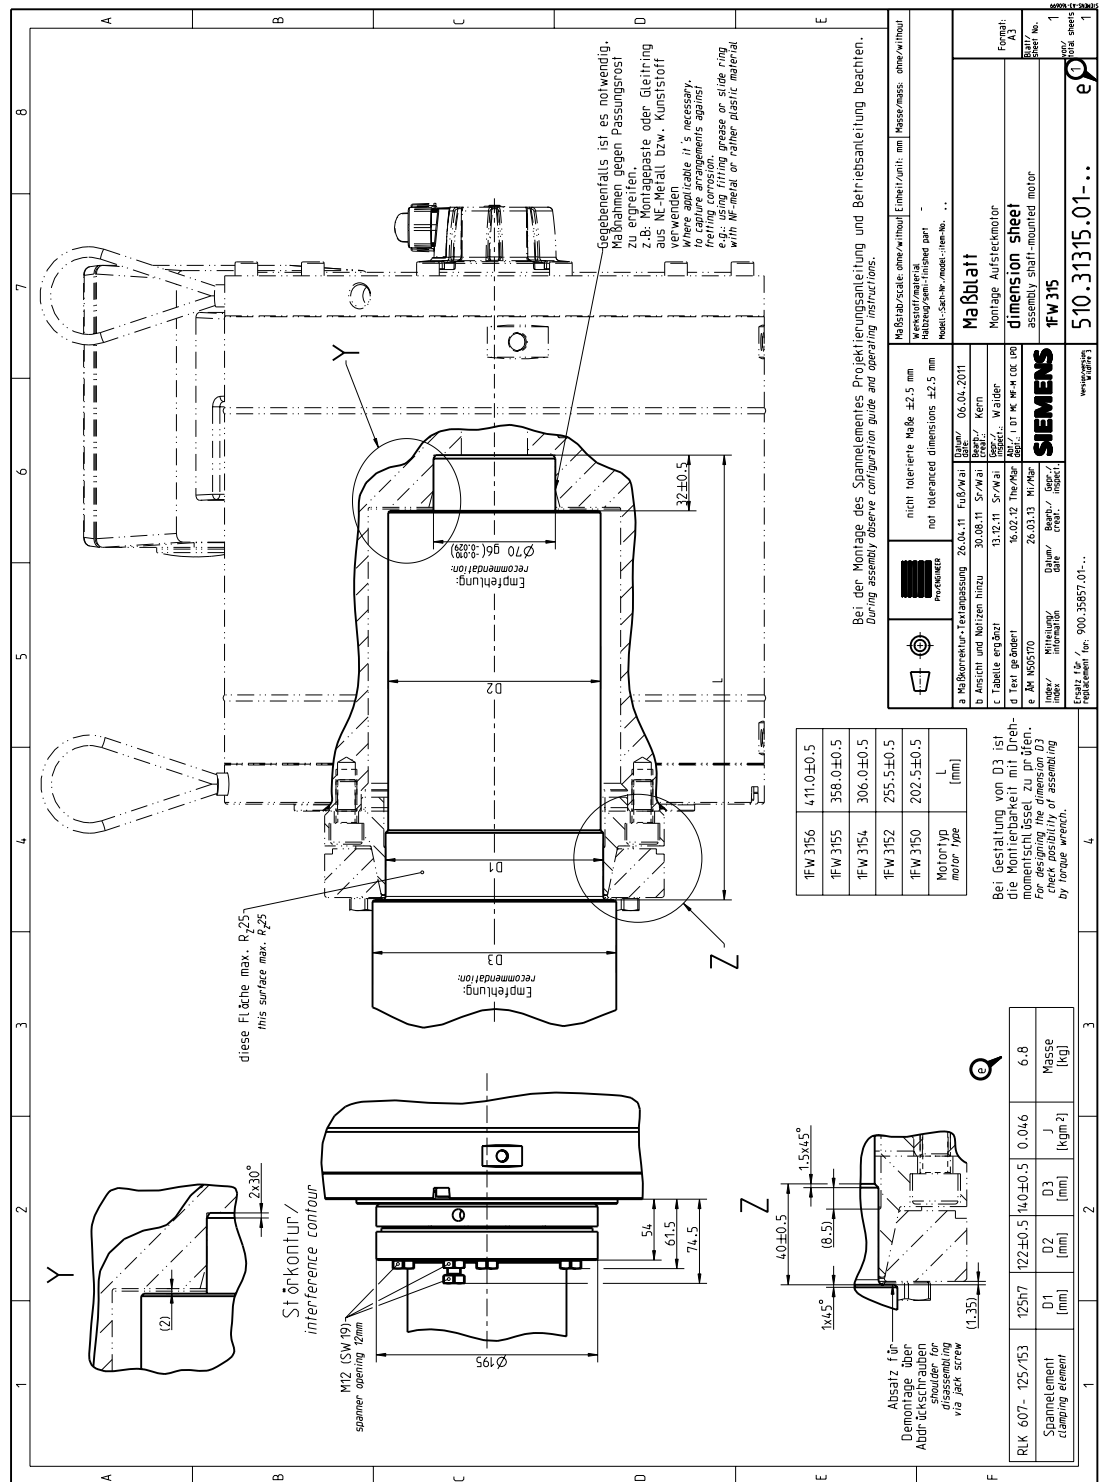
Dimension drawing, mounting plug-on motor 1FW315
